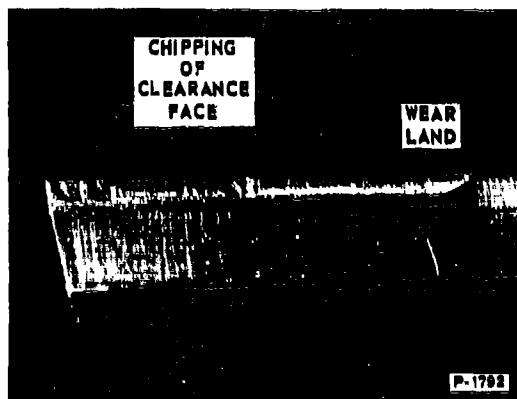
Tool Tip Showing Chipped Clearance Face
